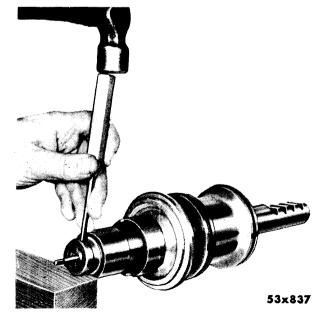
Locking Upper Piston Rod Nut Lock Cap
